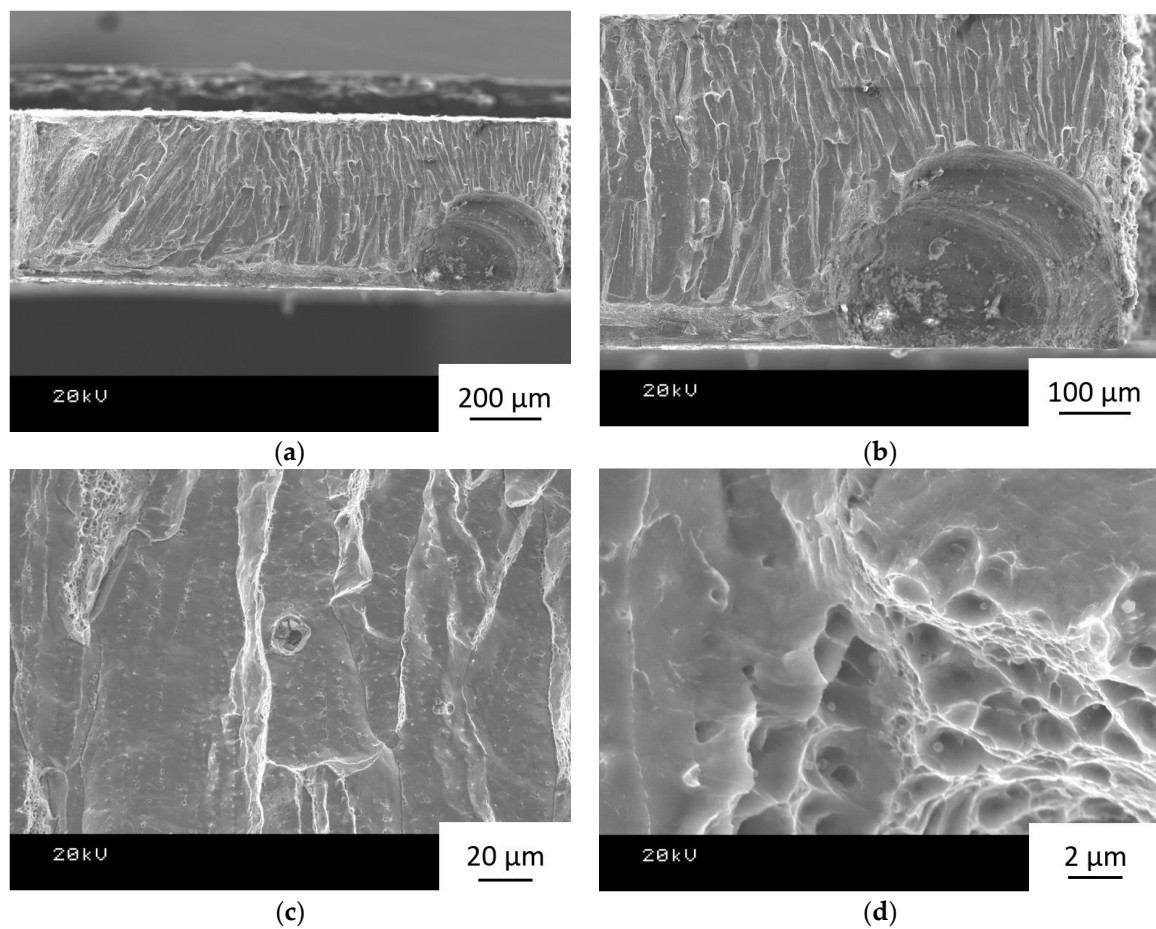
Fracture surface of 19_1 specimen: (a) View of the entire fracture surface; (b) Detail of the defect—pore in the corner of the fracture surface; (c) Predominantly intergranular fracture; and, (d) Detail of a ductile fracture region.
